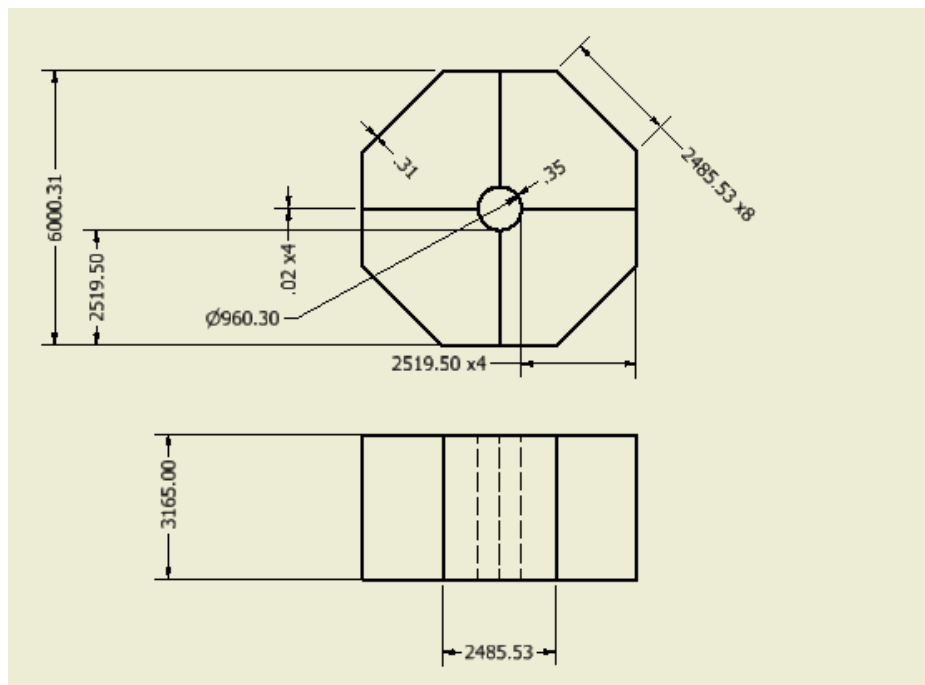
Full Dimensioned Drawing of Octagonal Base (mm)
